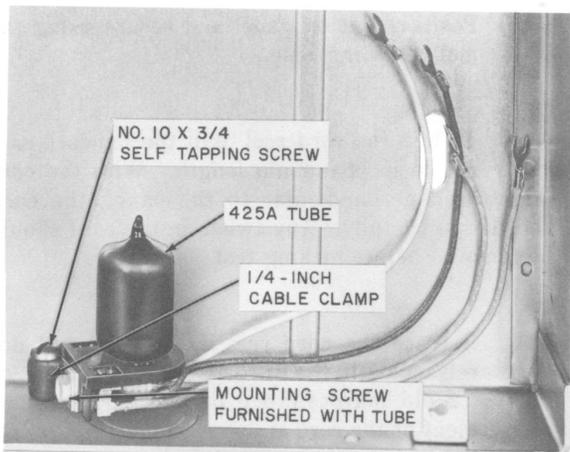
Installation of Cold-Cathode Tube in Apparatus Box
